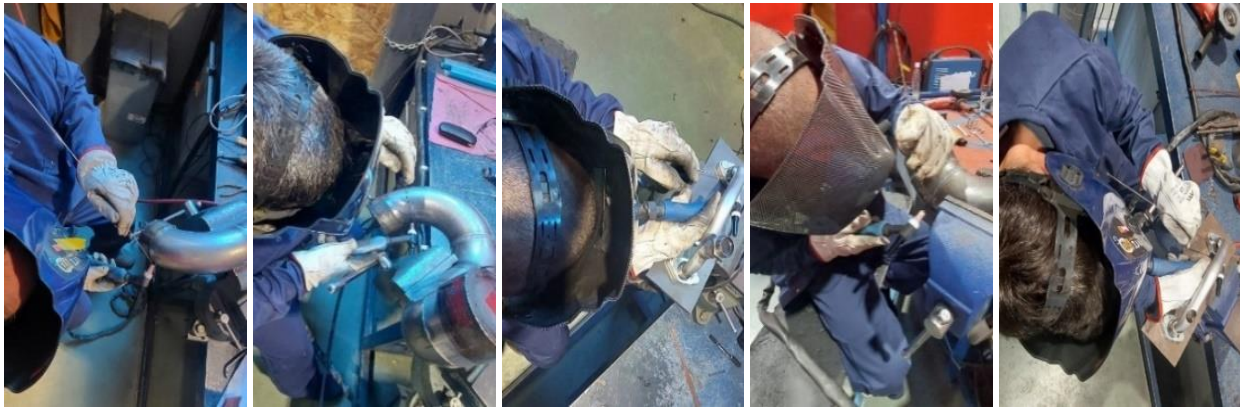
View parallel to the palm placement in the selected posture of welders 101 – 105
